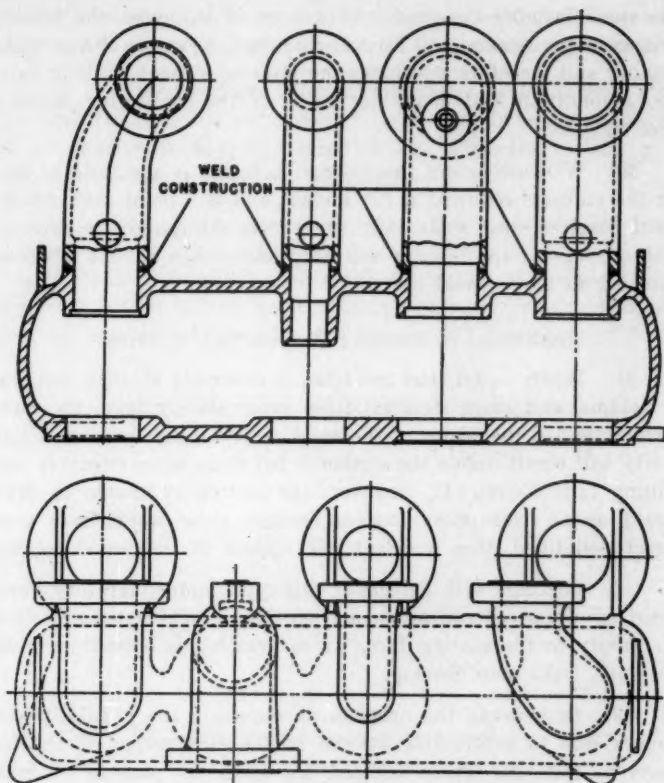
THROTTLE VALVE CASTING (CAST WELD CONSTRUCTION).
